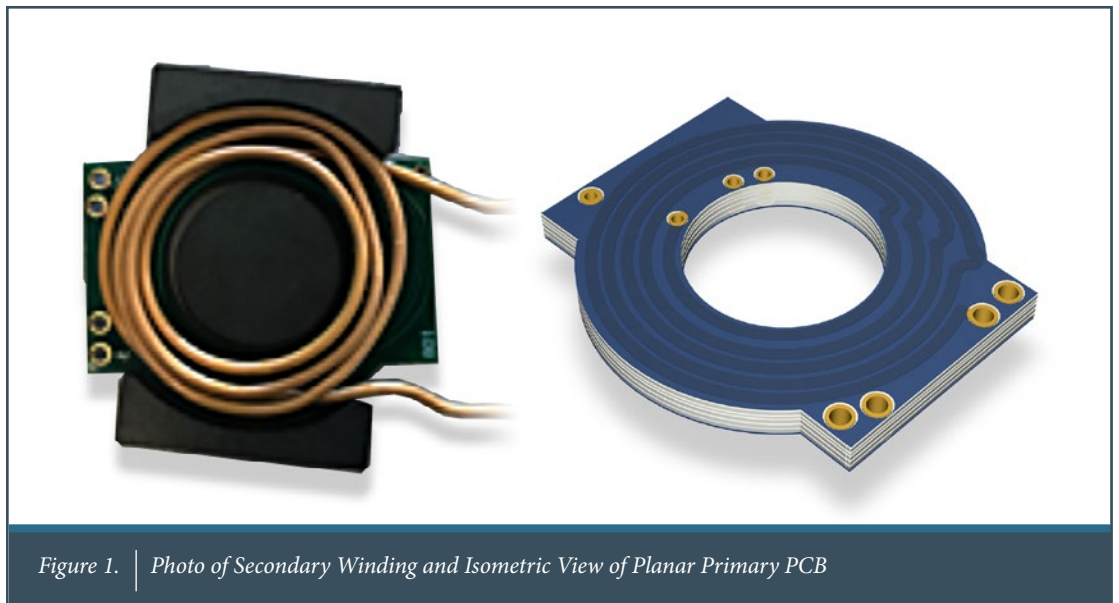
| Photo of Secondary Winding and Isometric View of Planar Primary PCB
